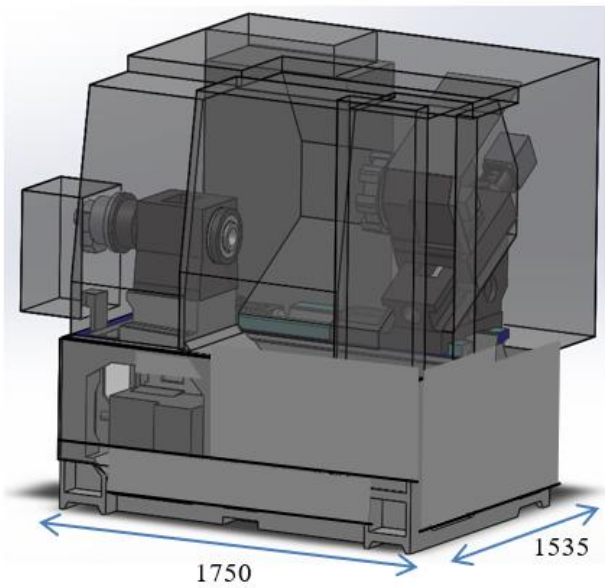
Schematic view of CAD model in CNC lathe with total enclosure
